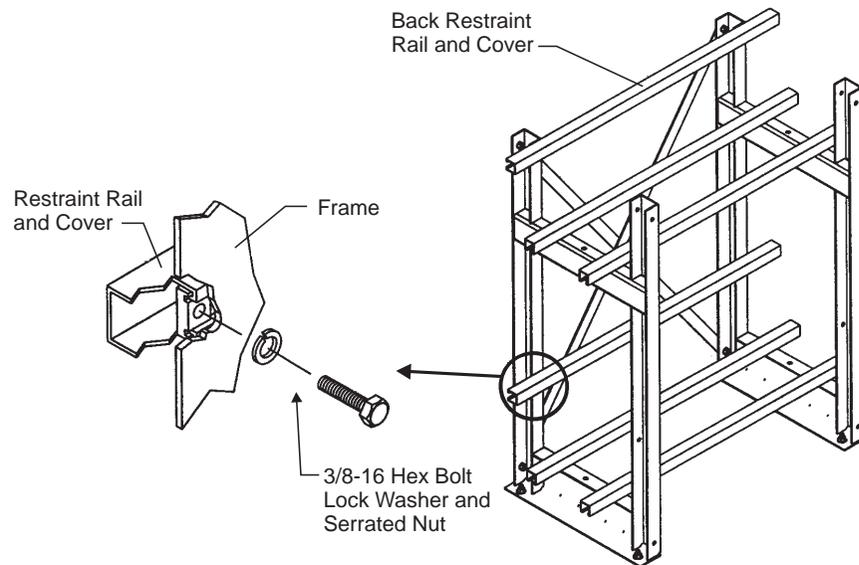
Support Rail Installation With Detail of Frame and Support Rail Connection
